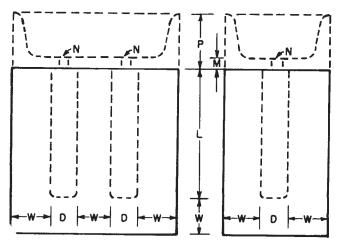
Design and Dimensions for Mold for Separately Cast Cylindrical Test Bars
